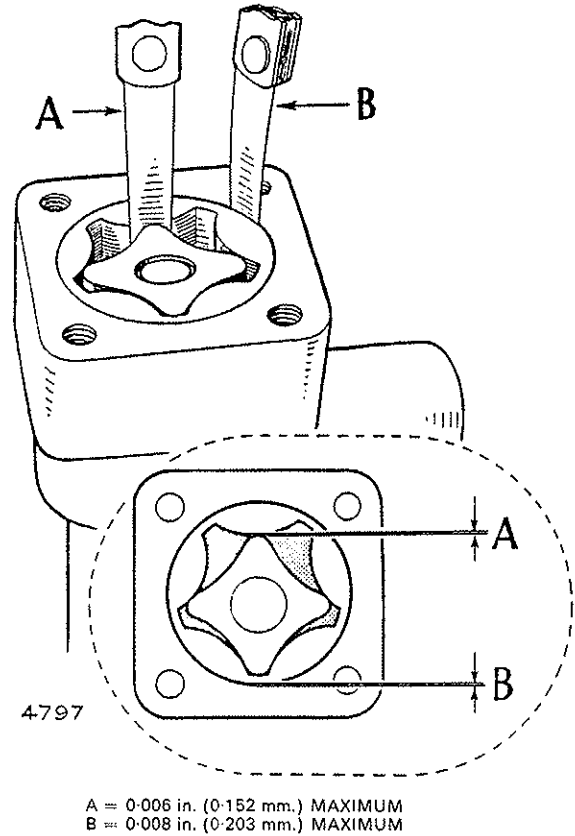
Checking the rotor lobe and driven ring clearance dimensions
